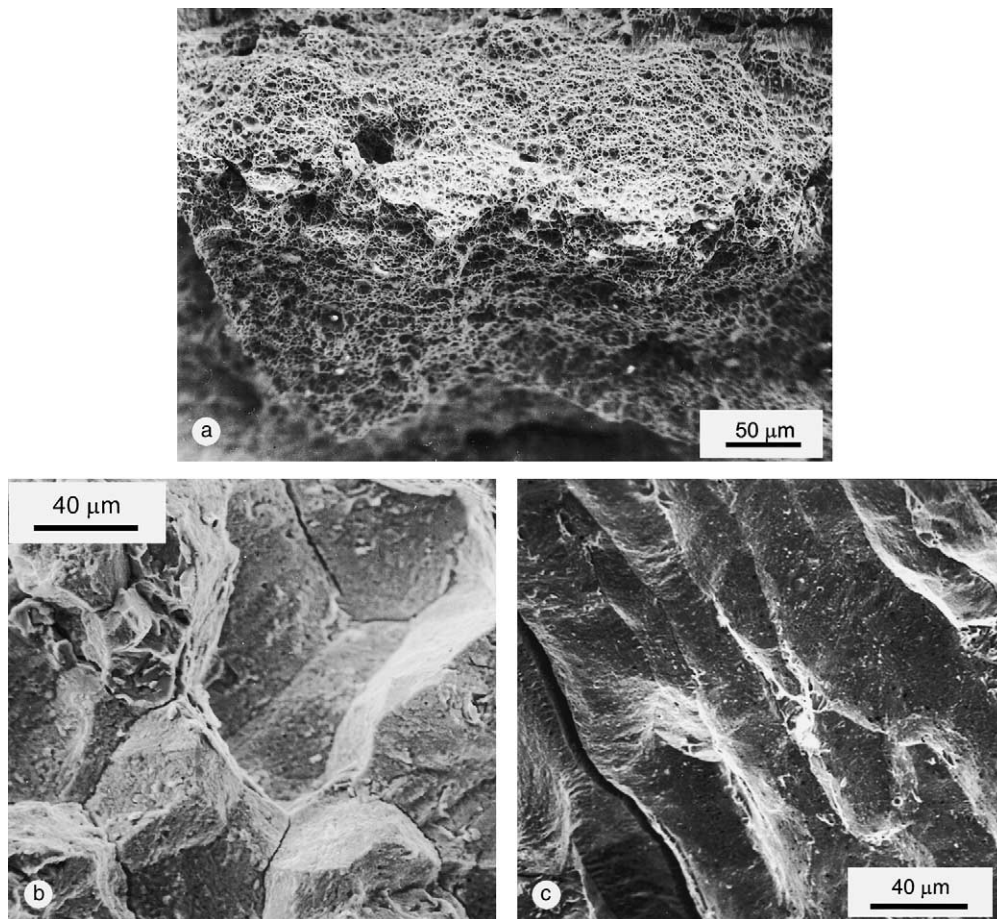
Typical regions of intergranular fracture in irradiated impact specimens of pressure vessel steels: (a) ductile intergranular fracture, (b) brittle intergranular fracture of base metal and (c) brittle intergranular fracture of weld metal.
